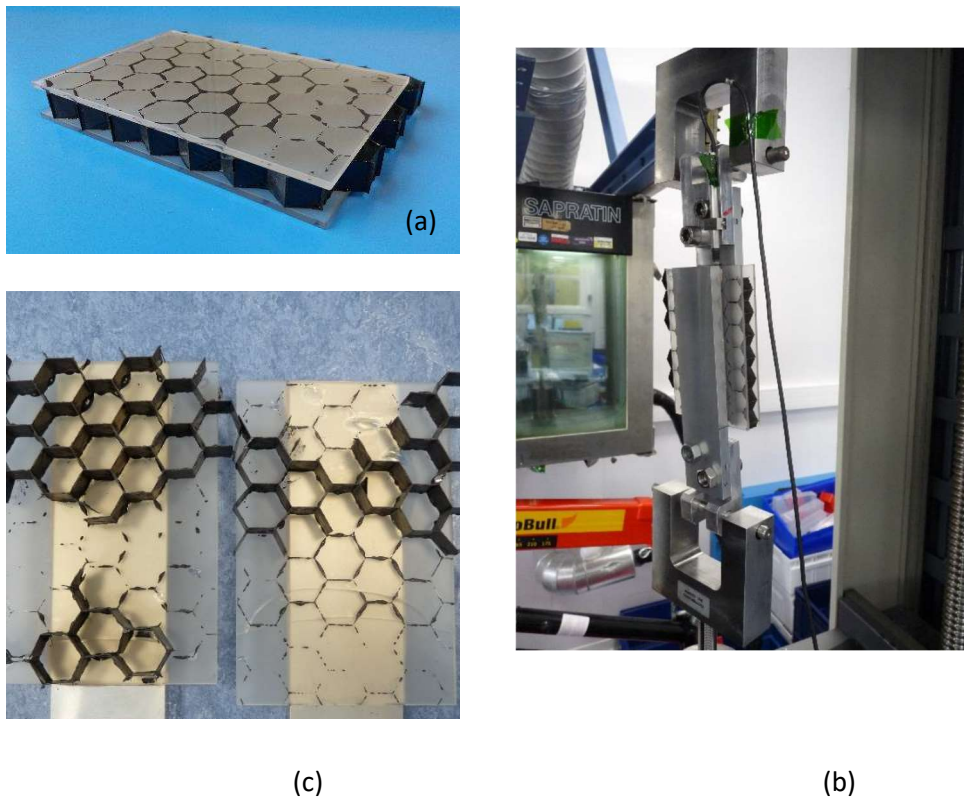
Phenolic resin bonded (PH150) Zerodur™-CFRP honeycomb-Zerodur™ sandwich assembly (150 mm x100 mm) (a) for shear test (b) and fracture surface of sandwiches after tensile test (c)
